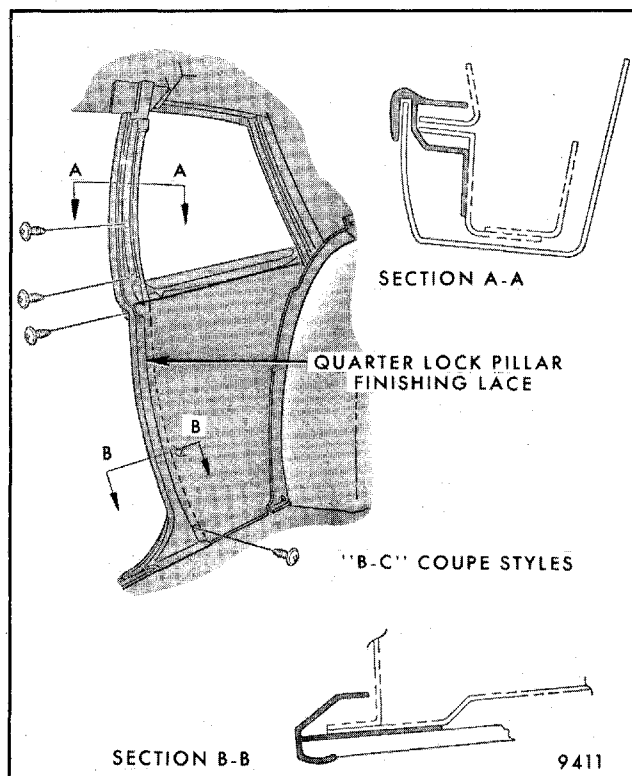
Body Lock Pillar Finishing Lace - "B,C" Styles Shown, "A" Styles Similar
